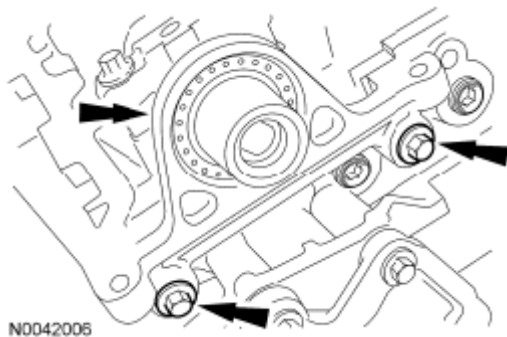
Locating Camshaft Oil Seal Retainer & Bolts
